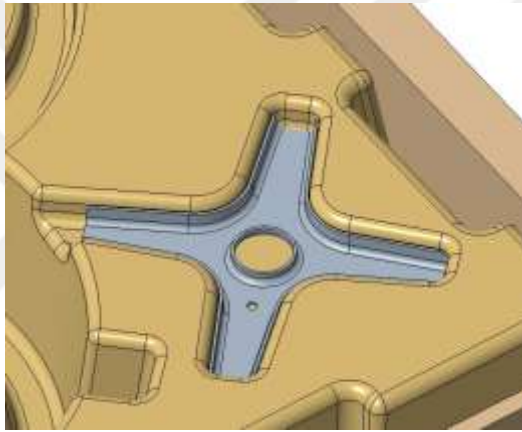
Cross-section-1 view of grill and top molded part.
